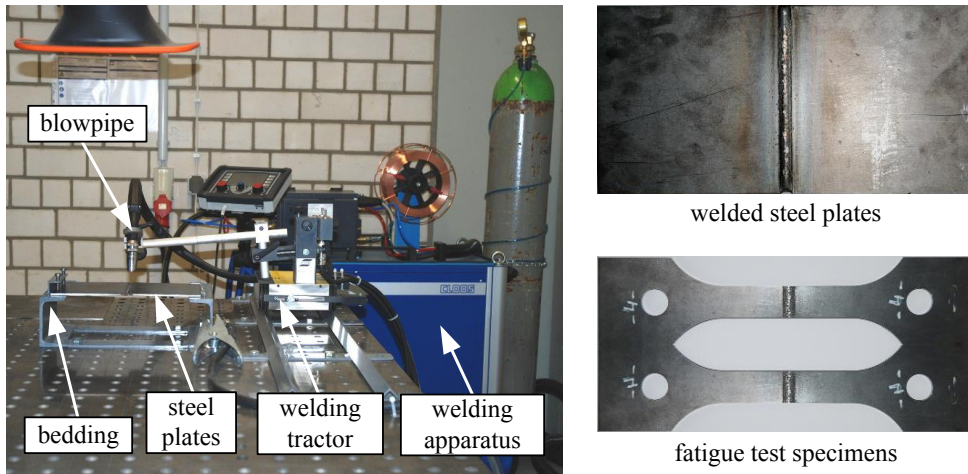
Set up of the welding equipment (left) and welded steel plates and fatigue test specimen (right).
